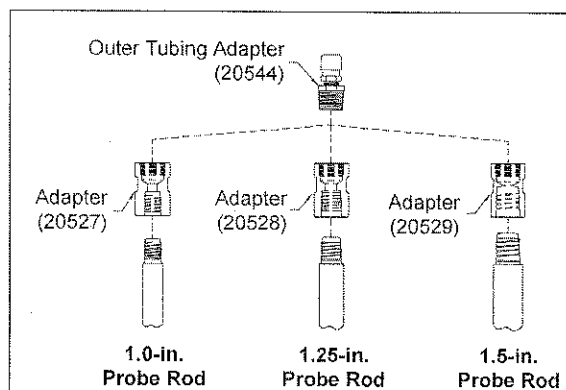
Adapters for attaching the outer tube to 1.0-, 1.25-, and 1.5-inch probe rods.
